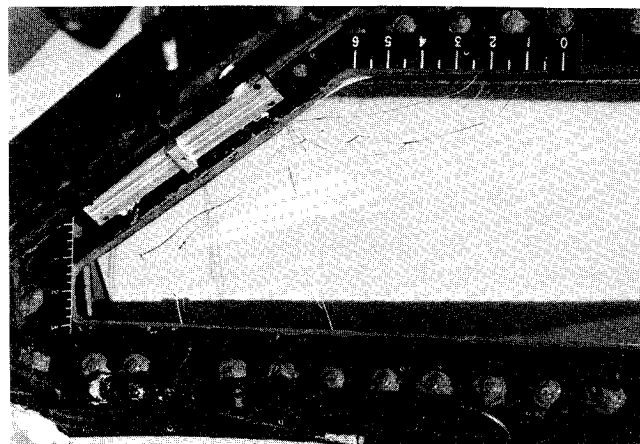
X-15 cracked left-hand inner panel; outside view; flight 3-18.
